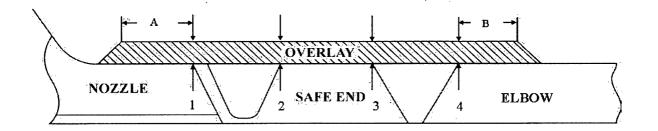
Hot Leg Nozzle Weld Overlay Geometry, Minimum Dimensions (Schematic Representation)
